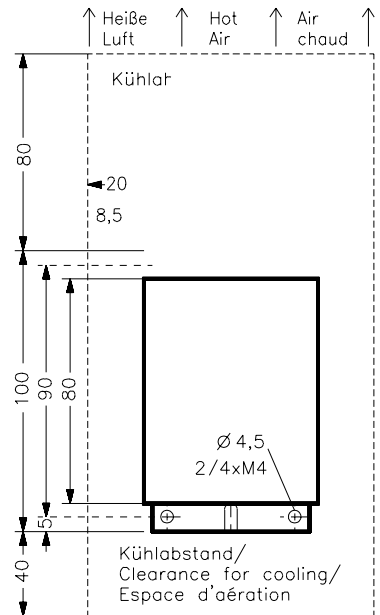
Outline drawing and mounting OPTION 100BR001
